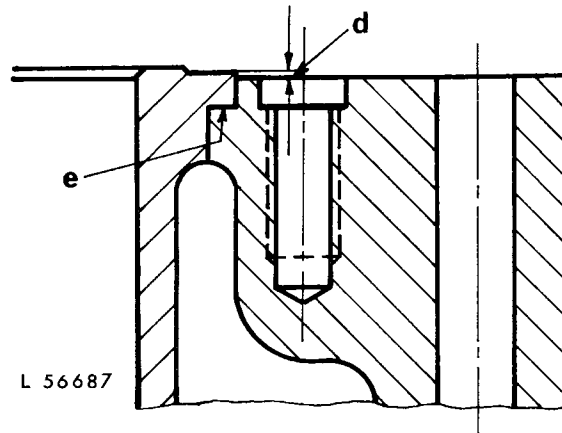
Upper Fit and Sealing Face of Cylinder Liner in Cylinder Block
